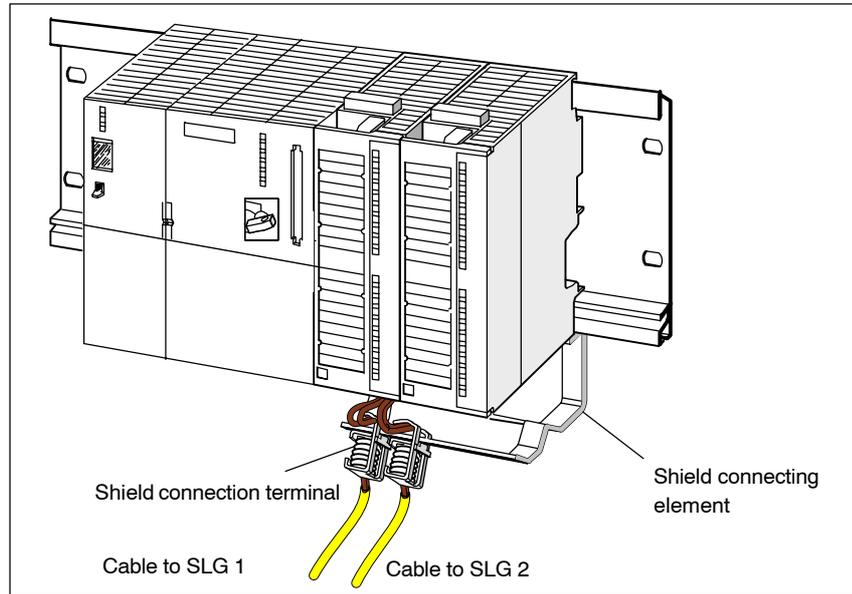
Layout of the ASM 470/475 with shield connecting element
